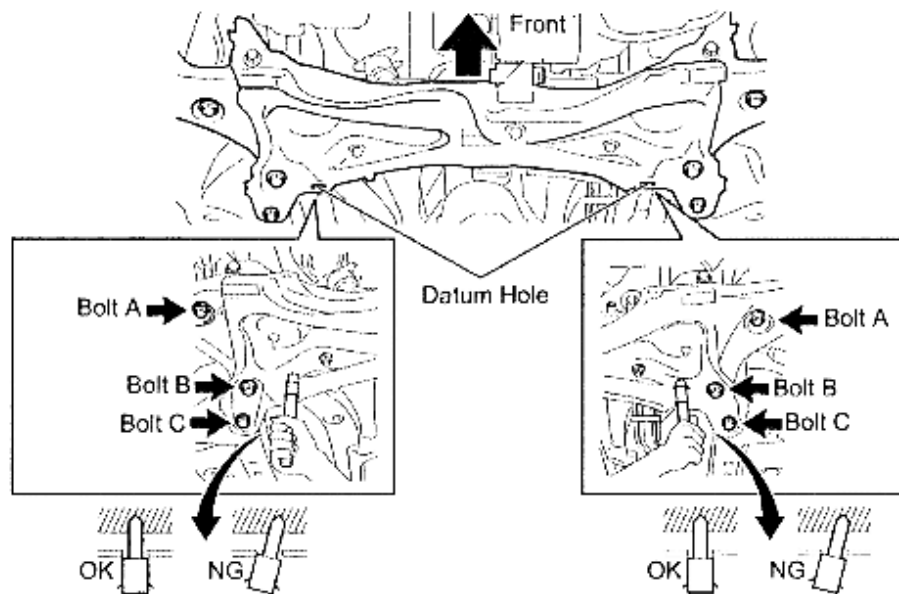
Identifying SST Into Datum Holes In Front Suspens Crossmember (2 Of 2)
